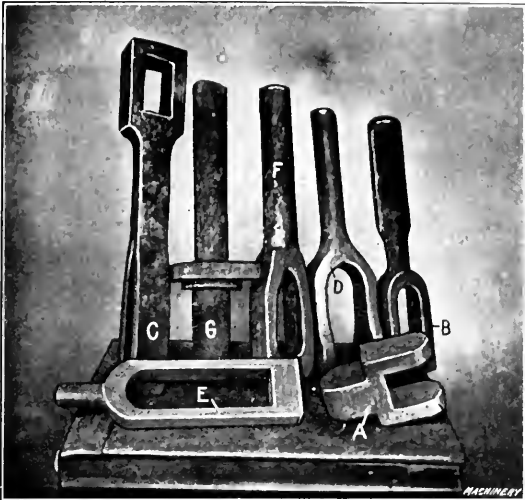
Miscellaneous Examples of Lap-welding and Forming Operations accomplished on a 6-inch Ajax Universal Forging Machine
